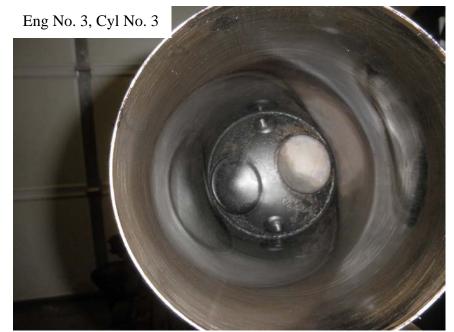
View of the inside of the No. 3 cylinder showing no damage to the barrel and the valves centered in the closed position.
